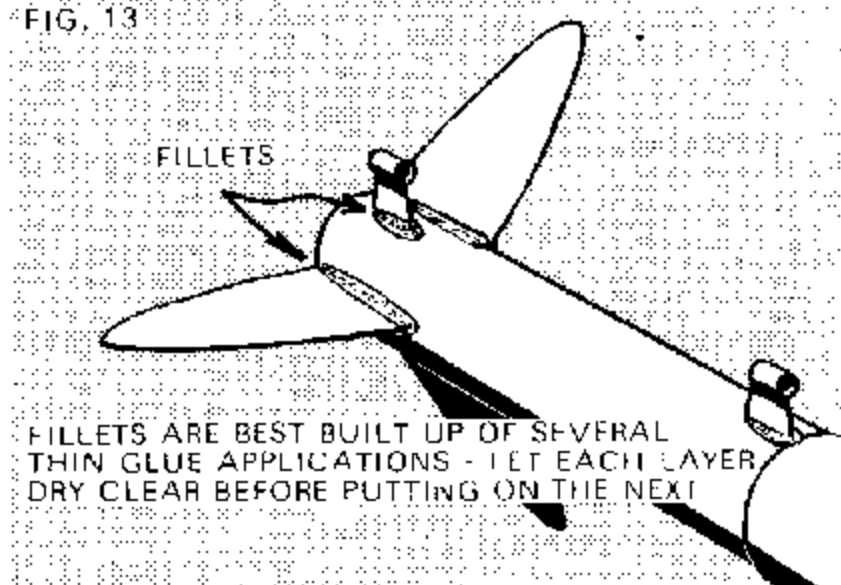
Assemble a 12" parachute while waiting for the glue to dry. After it is dry apply a fillet of glue to each fin-body joint as shown. Support the model horizontally while the fillets dry.
